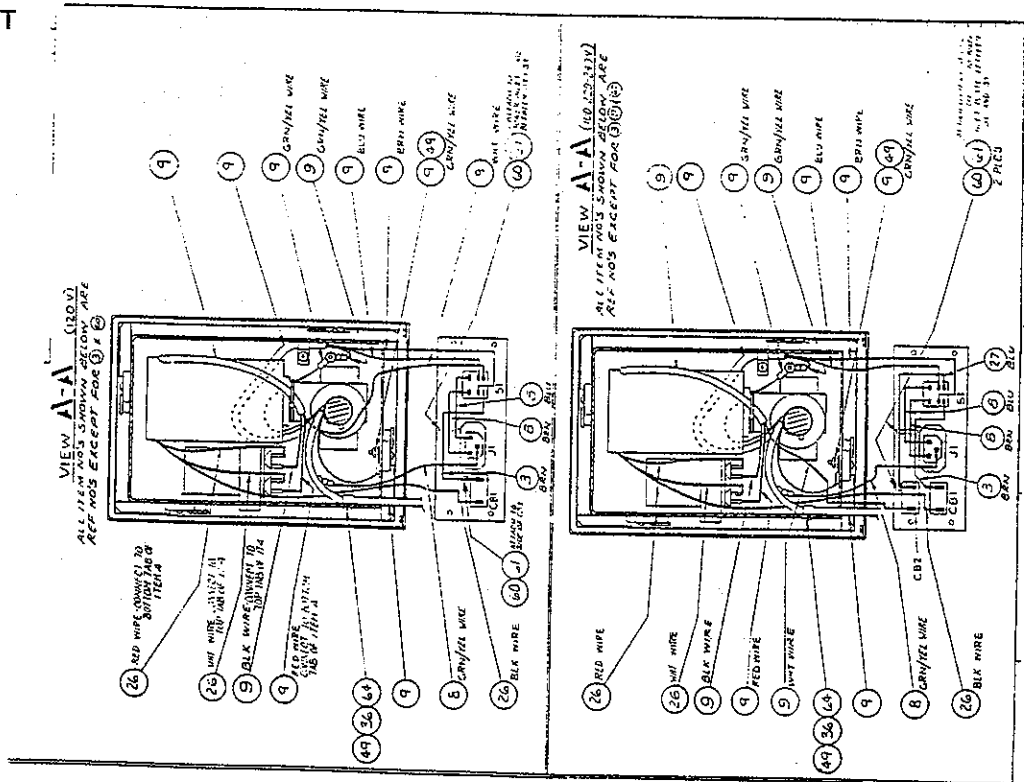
PARTS LOCATION DIAGRAM, VHA STAND ASSEMBLY (SHEET 2 OF 2)
